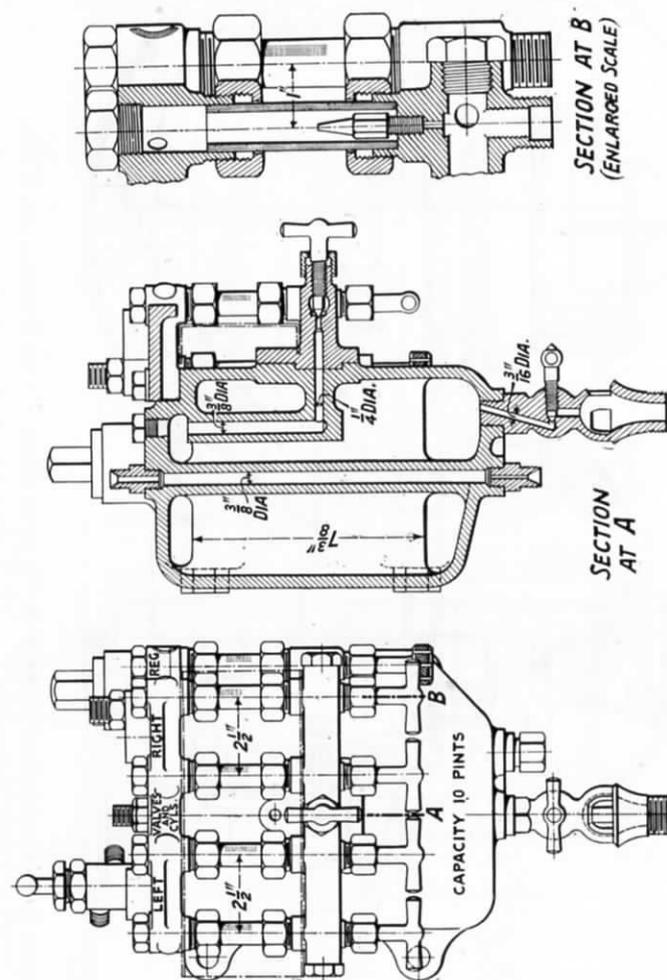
DETAILS OF SIGHT-FEED LUBRICATOR FOR REGULATOR AND CYLINDERS, G.W.R.
